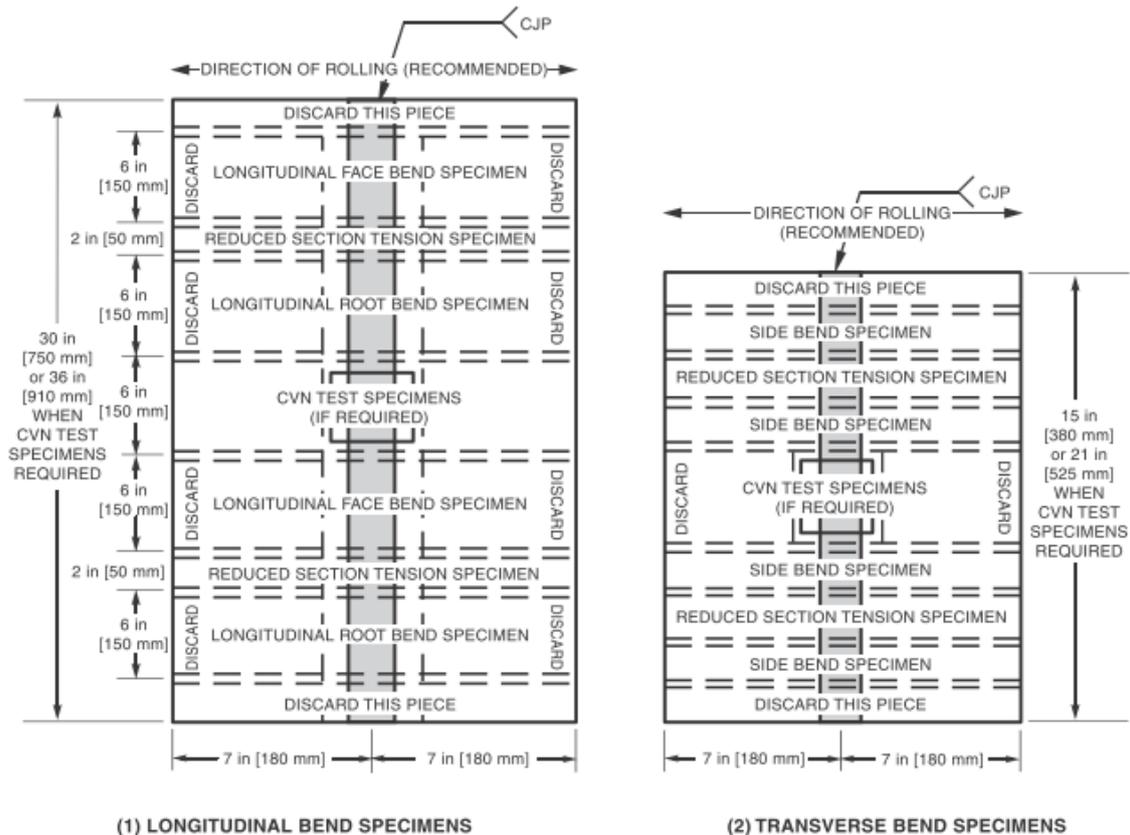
Location of Test Specimens on Welded Test Plates—ESW and EGW—WPS Qualification (see 4.9)
